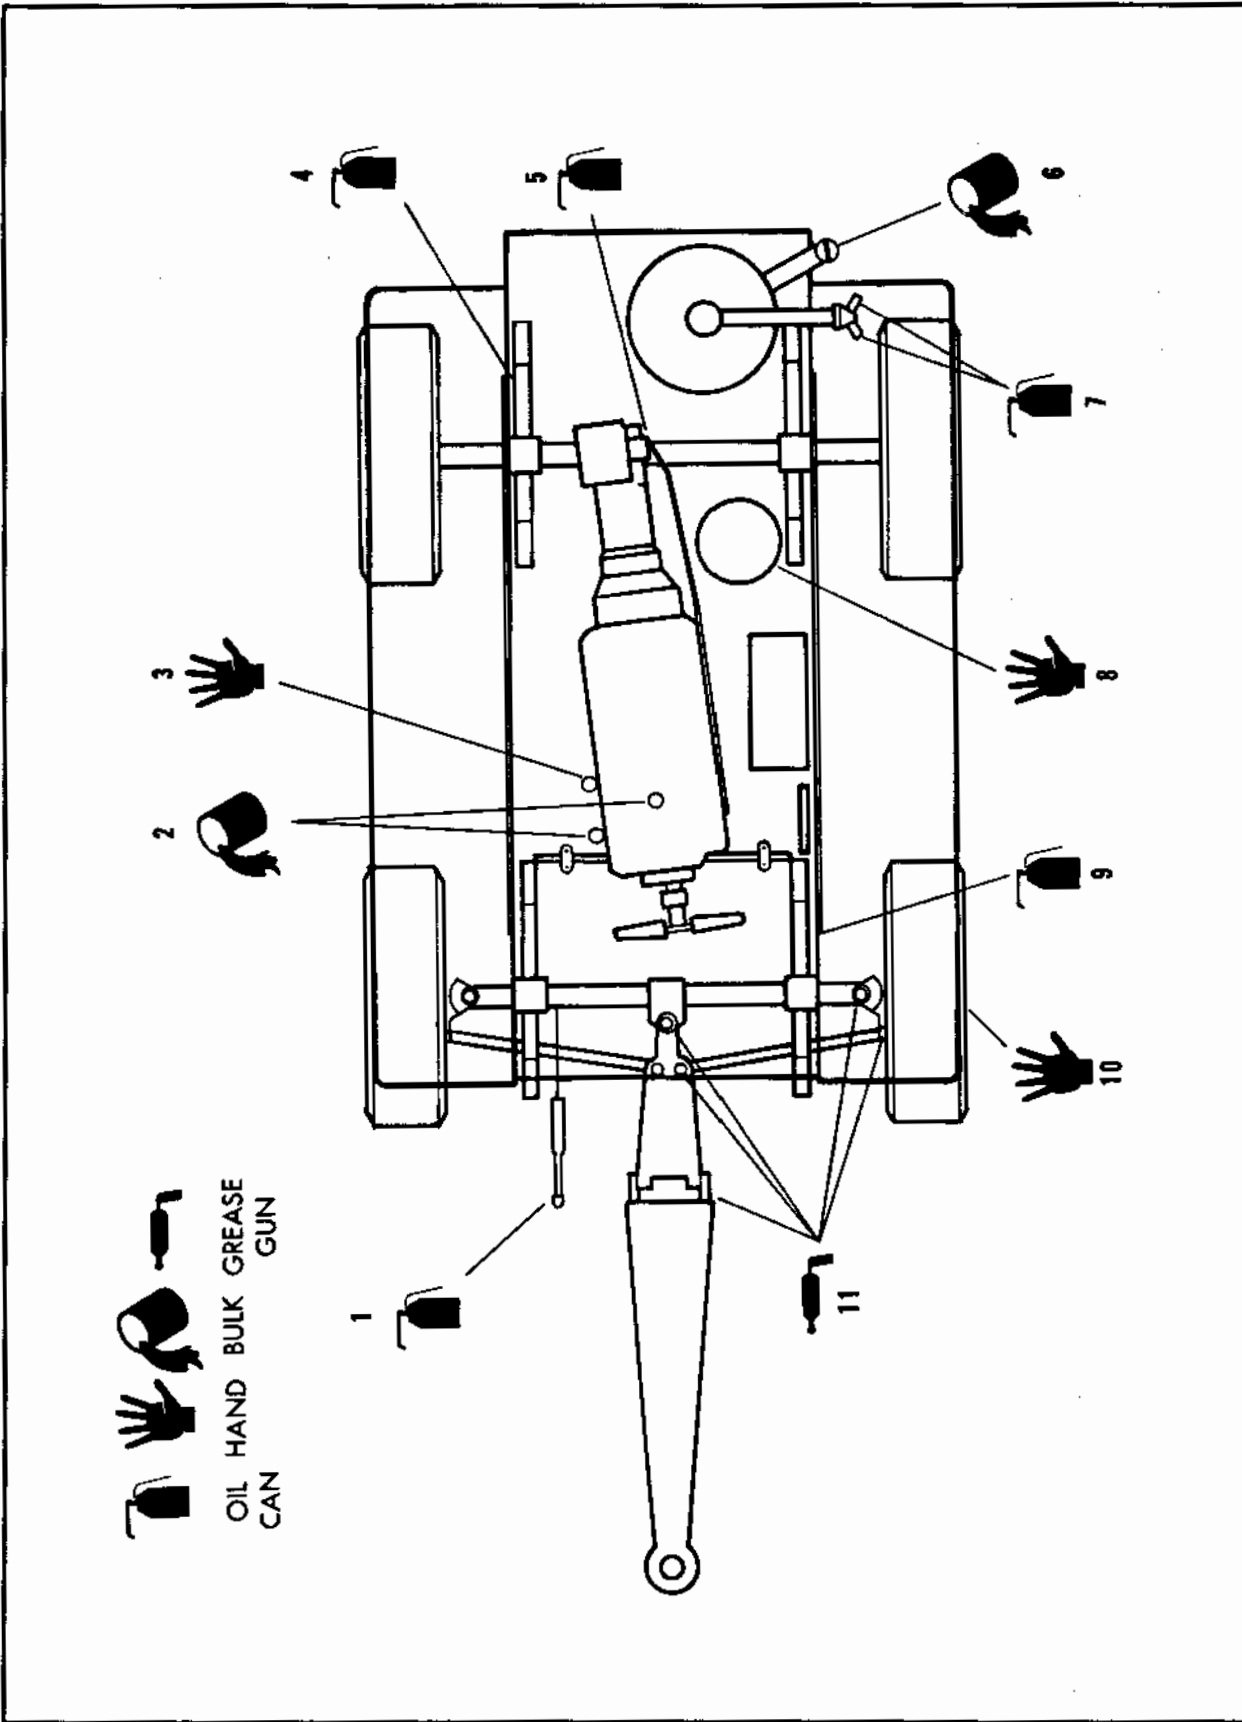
Lubrication Chart (Sheet 1 of 2)
